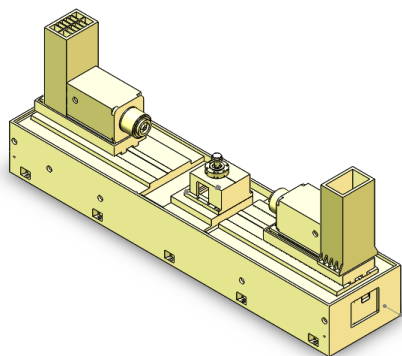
Assembly diagram of Horizontal double-sided combination machine
